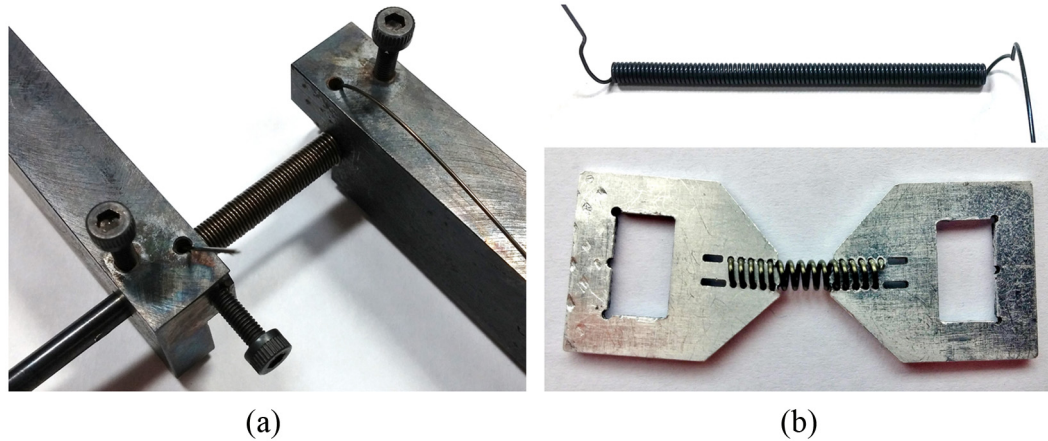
Spring fabrication: (a) SMA wire fixture used to keep the wire as a helical spring with inner diameter of 4 mm during shape setting; (b) SMA wire after second shape setting having an inner diameter of 2 mm (top) and SMA spring in its grips used when performing tensile tests after releasing it from the fixture (bottom).
